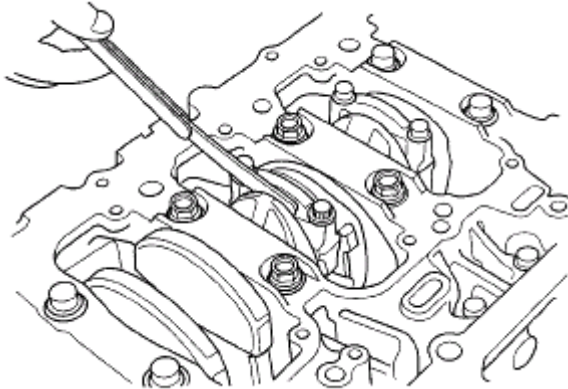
Measuring Connecting Rod End Play With Feeler Gauge
